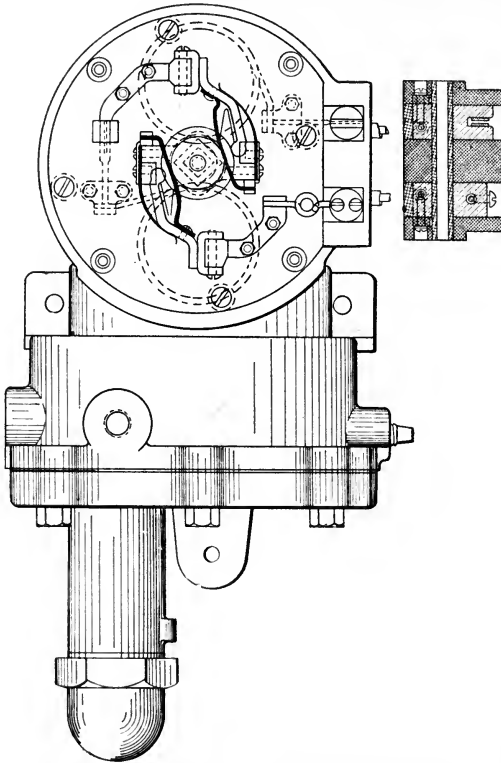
Pump-Governor for Air-Compressor, Front View.
